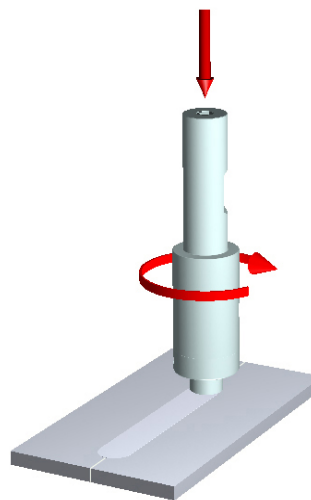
FSW – Principles of the Friction Stir Weld Process
